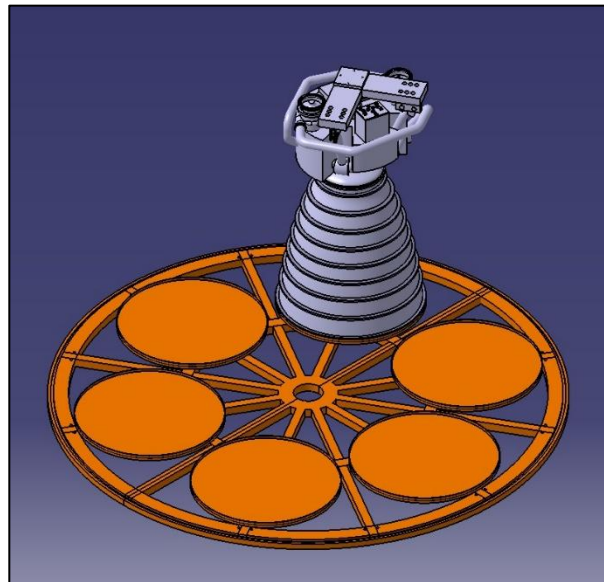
RS-25 Positioned on the Circular Fixture Base Plate
